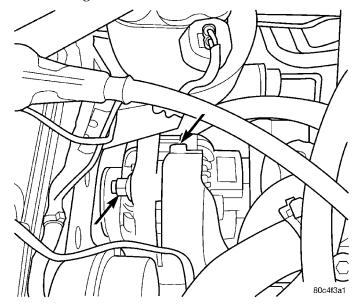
Generator T-Bolt Locknut and Adjustment Bolt
